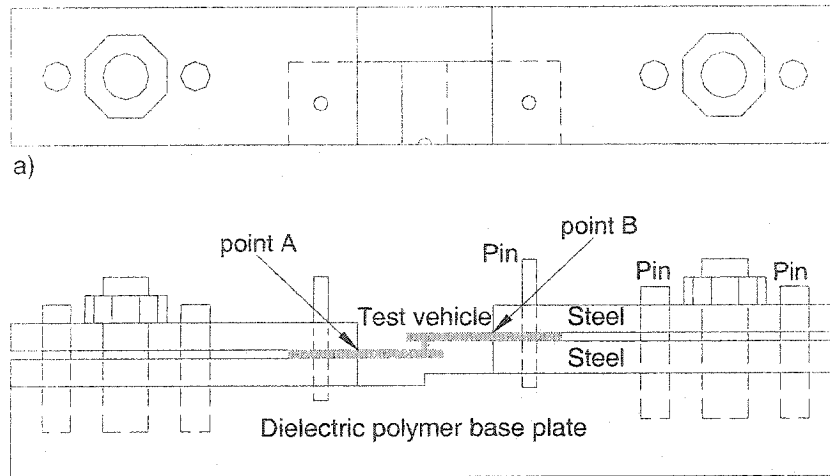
The schematic diagram of the test vehicle fixture (a) plane view (b) the front view
